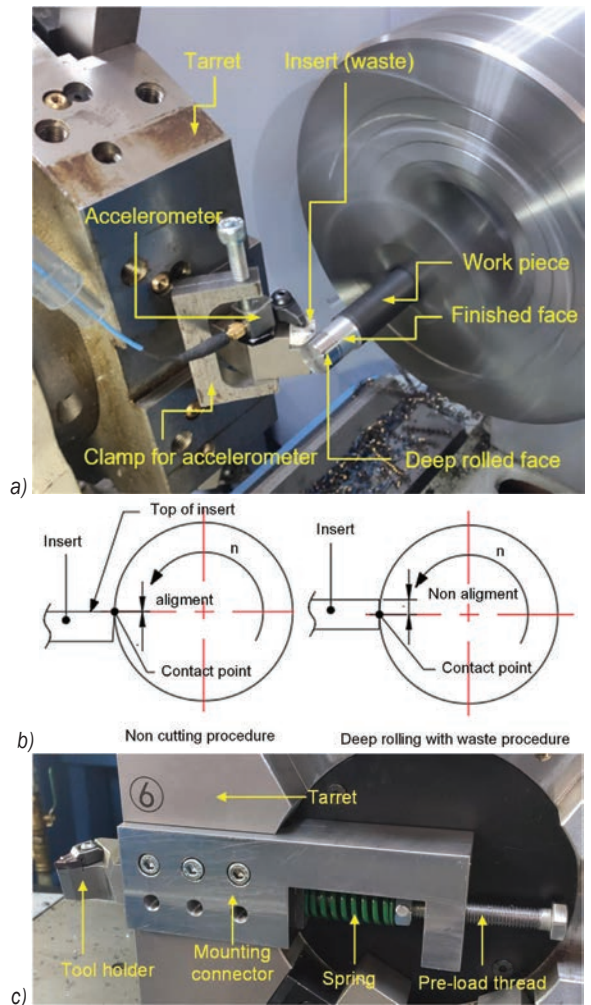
Schematic representation of conducting deep rolling and aligning waste cutting tool with workpiece a) All operations b) tool alignment c) tool holder
